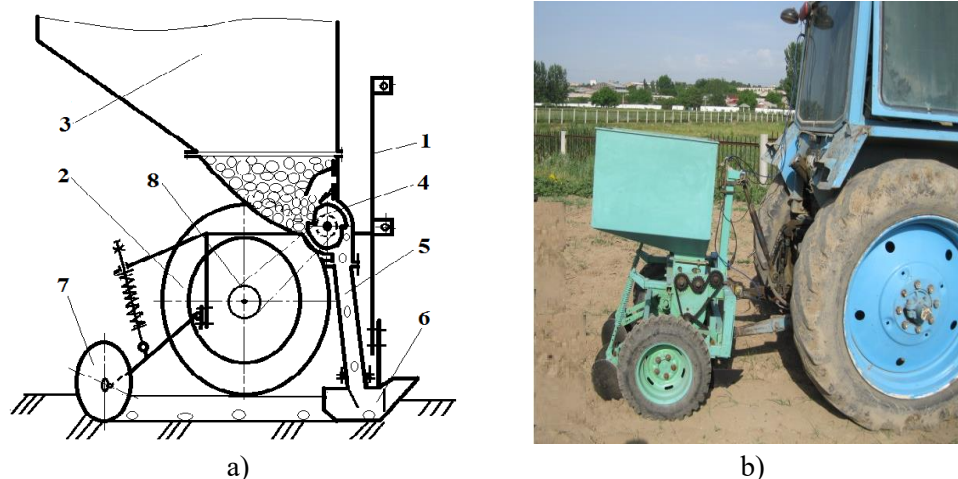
Potato planter equipped with a disc planter: a-diagram of the machine; b - general view of the machine. 1- frame; 2 - support wheel; 3 - bunker; 4 – disk planter device; 5 - tubers; 6 - coulter; 7 - closing device; 8 - chain drive.
